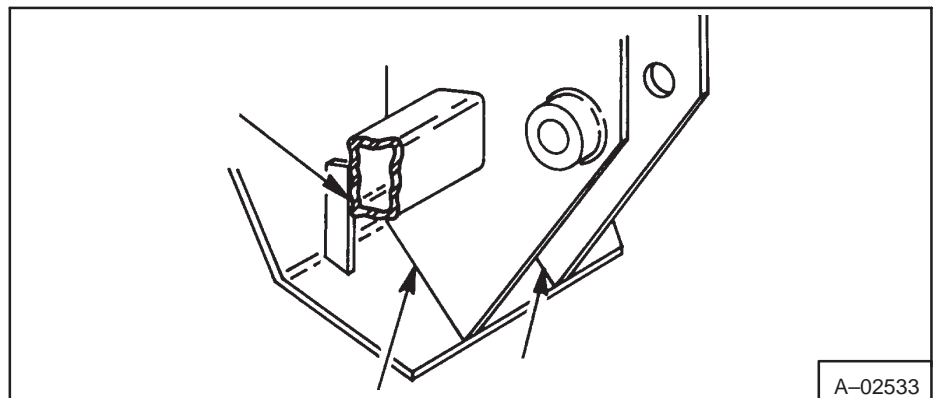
Weld Areas (0.250 inch Beads)
